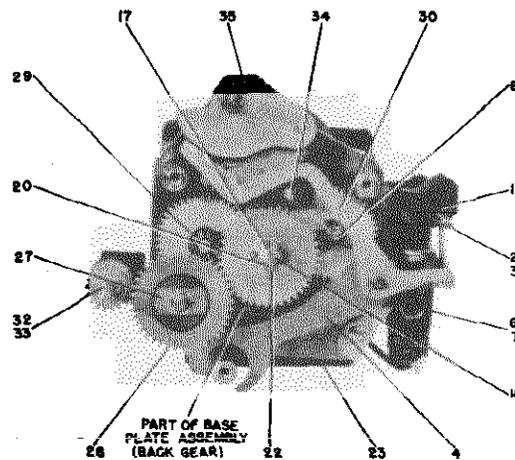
Front View, C57 Clocks—Front Plate Removed
